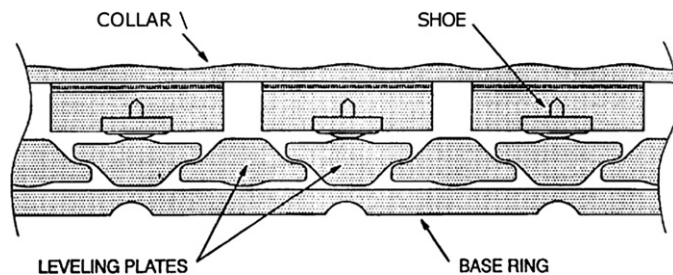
• Self-equalizing tilt-pad thrust bearing (view — looking down on assembly) (Courtesy of Kingsbury, Inc.)
